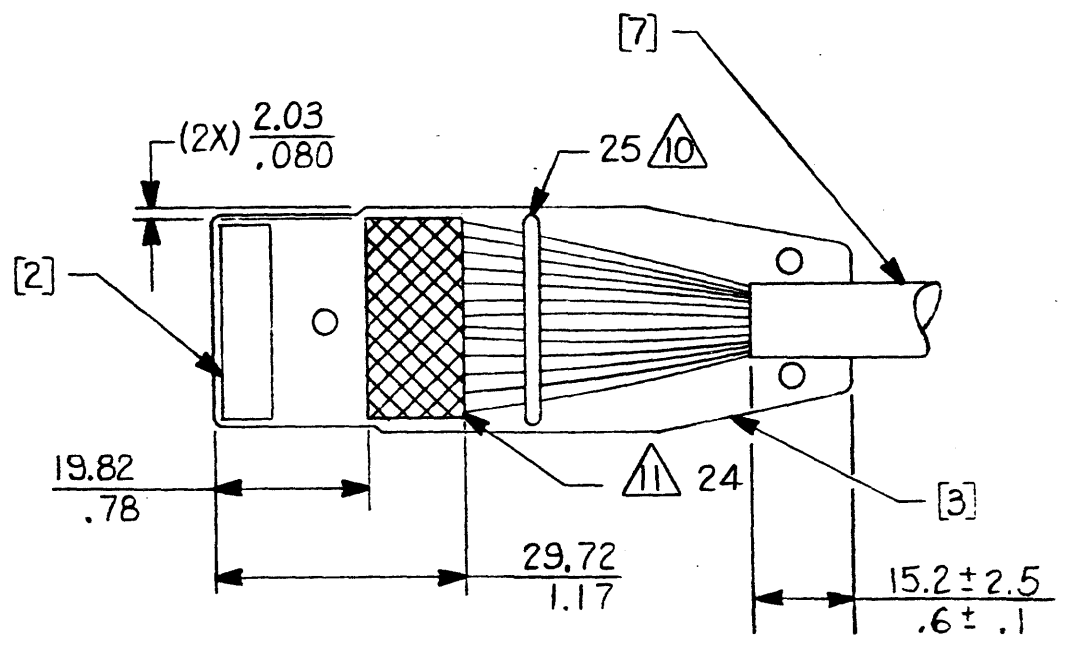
EXTERNAL CABLE ASSEMBLY
